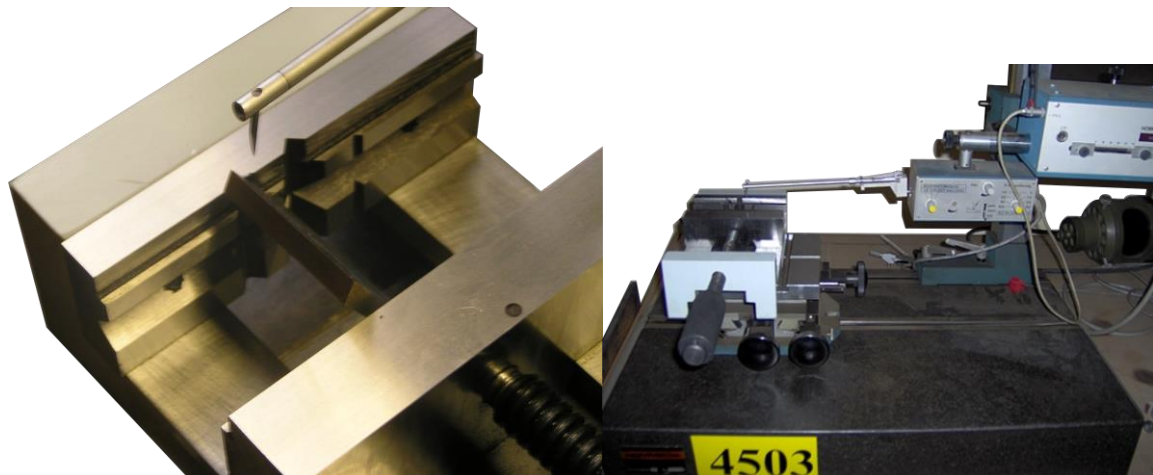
Measurement blunting using a Hommel Tester T 6 (D)
